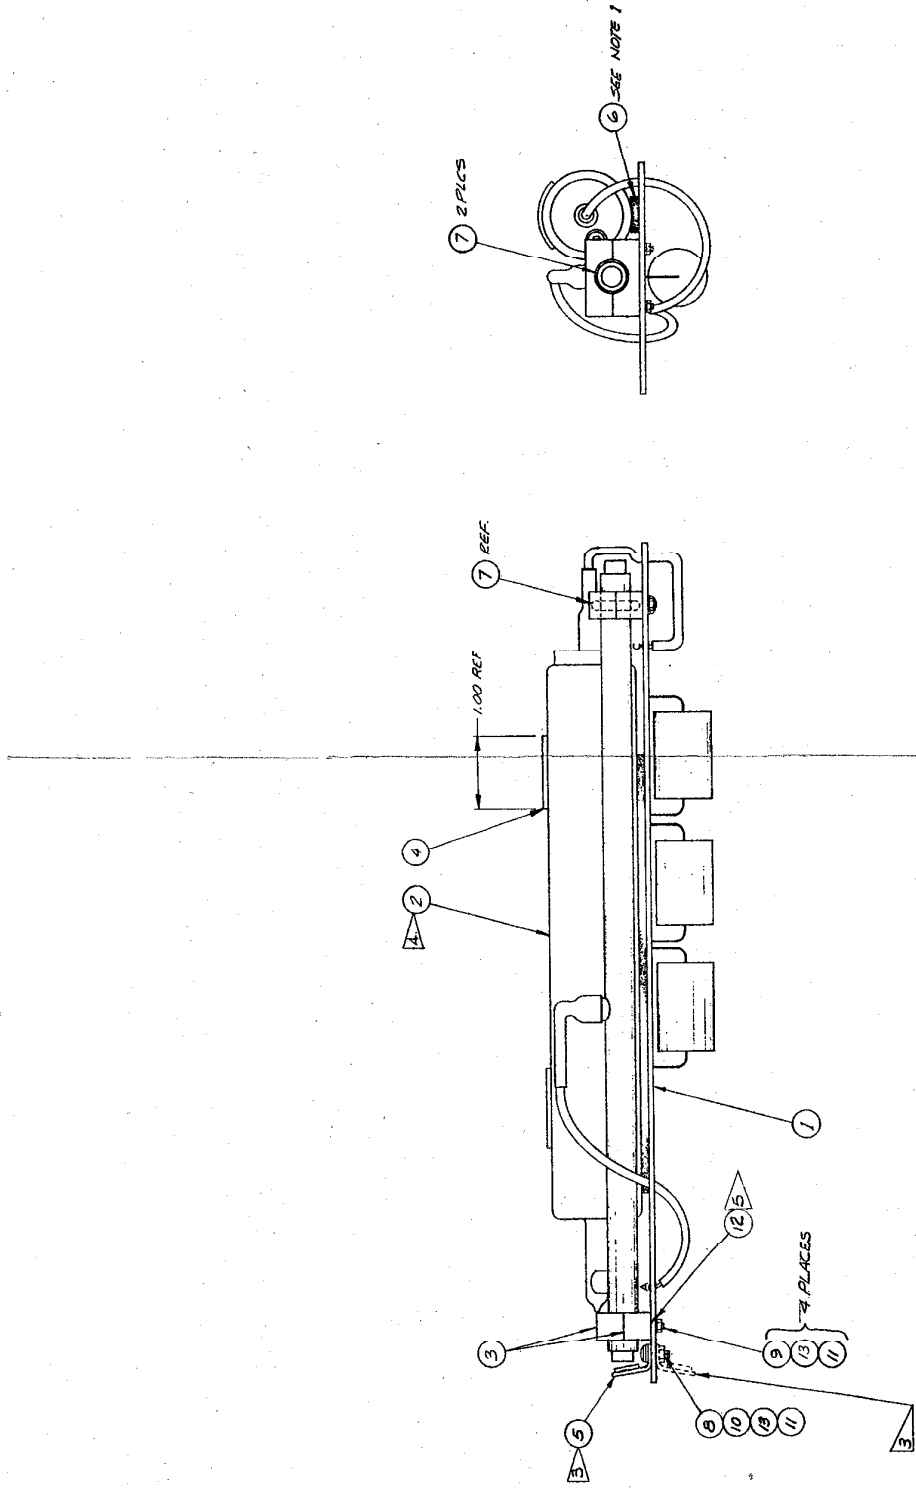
FIGURE H: Plasma Tube/Power Supply Assembly Drawing
